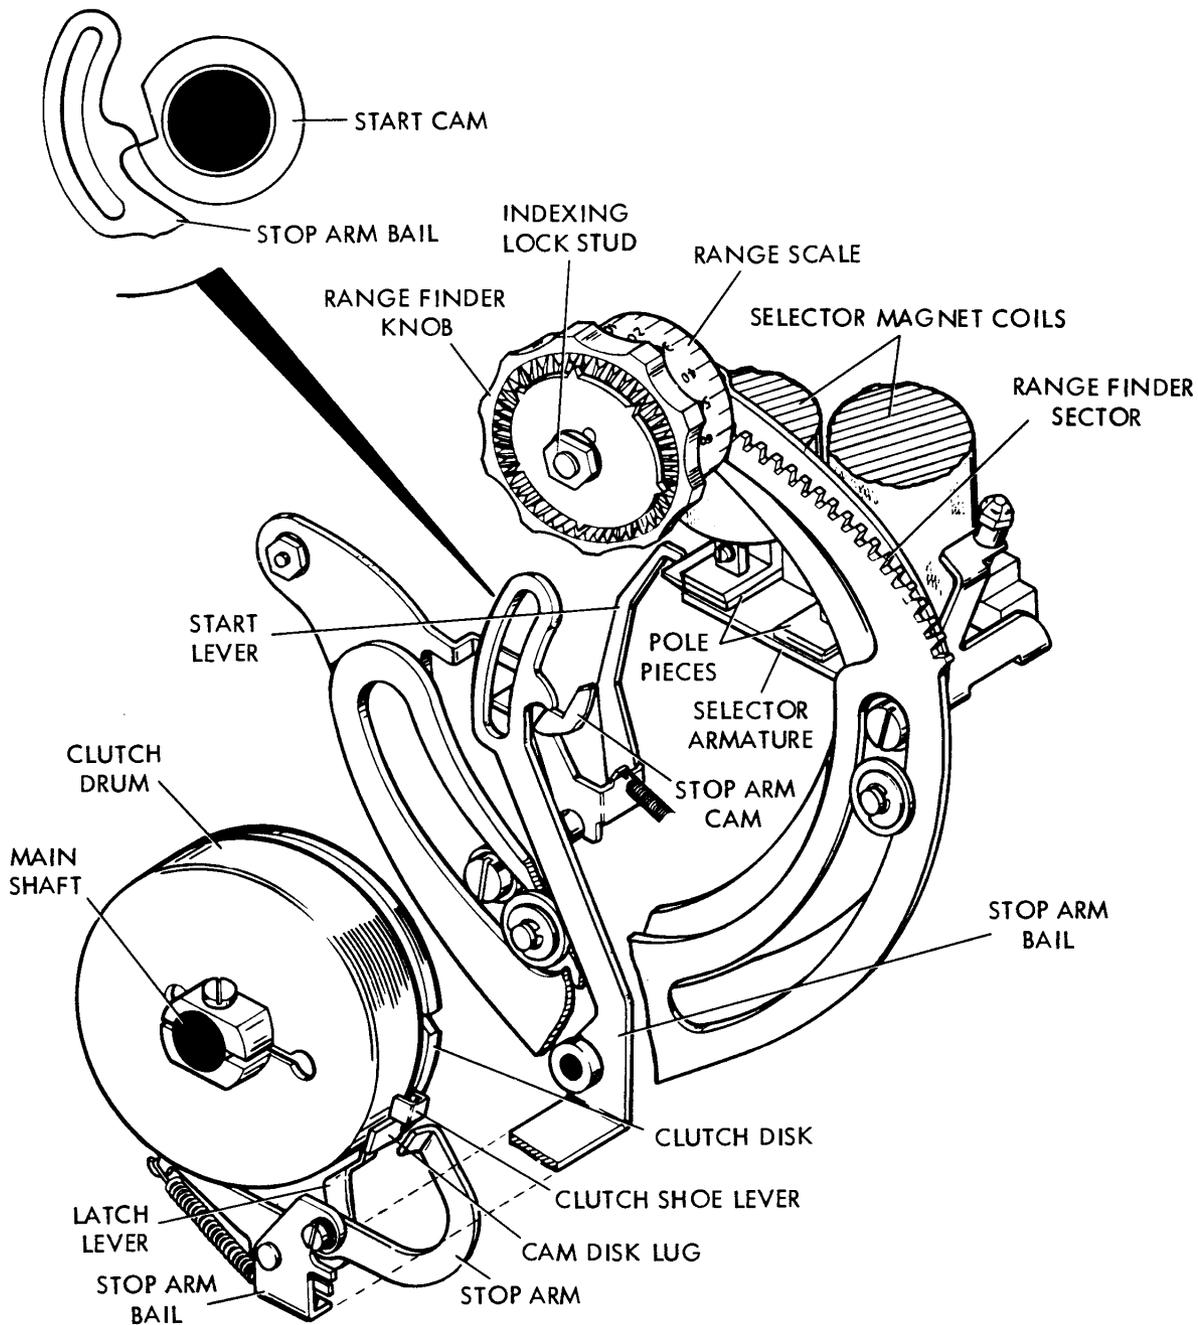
Range Finder and Selecting Cam-Clutch Trip Assembly
